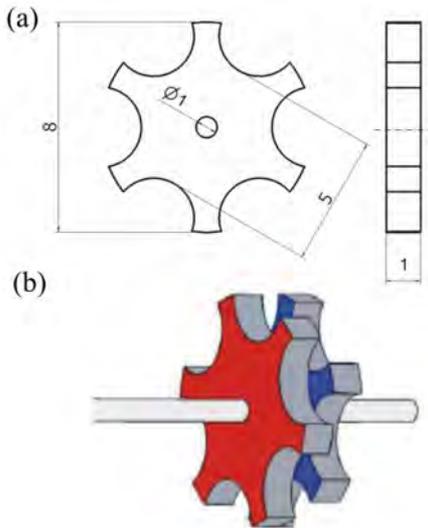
Disc stepper motor magnet (a) and concept of rotor composed of two discs (b)
